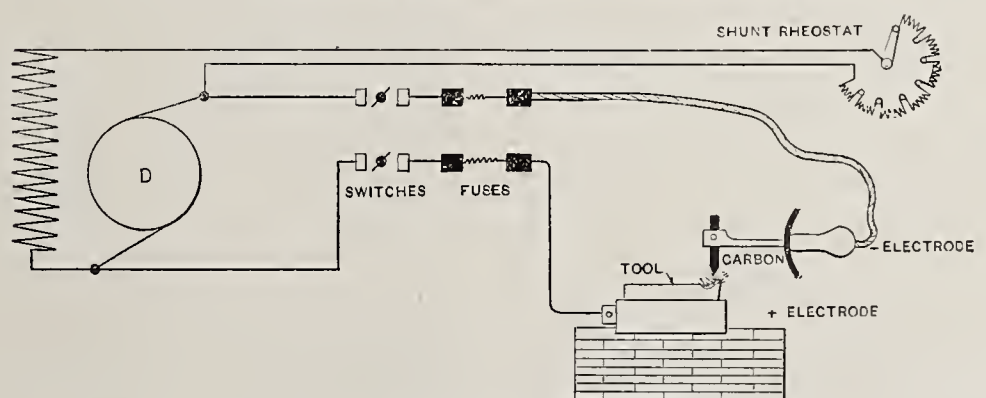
HEATING THE POINTS OF TOOLS BY THE ELECTRIC ARC
